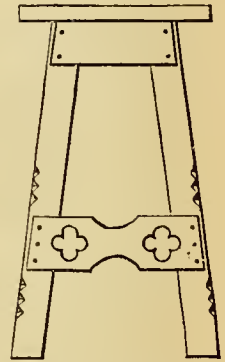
ELEVATION OF STOOL BEFORE COVERING.
